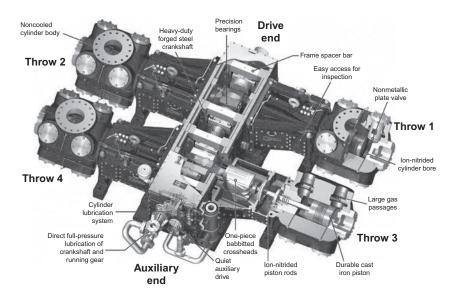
Cutaway view of a "separable" reciprocating compressor. Courtesy of McGraw-Hill Book Company.
